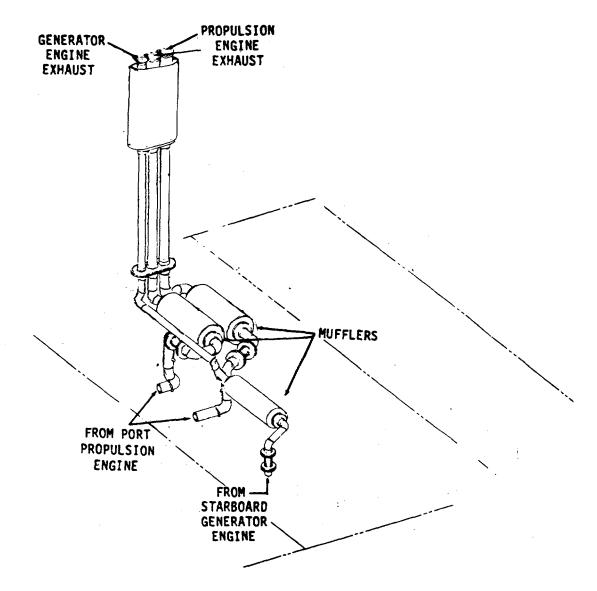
Diesel Engine Exhaust Piping/Aft Engine Room
